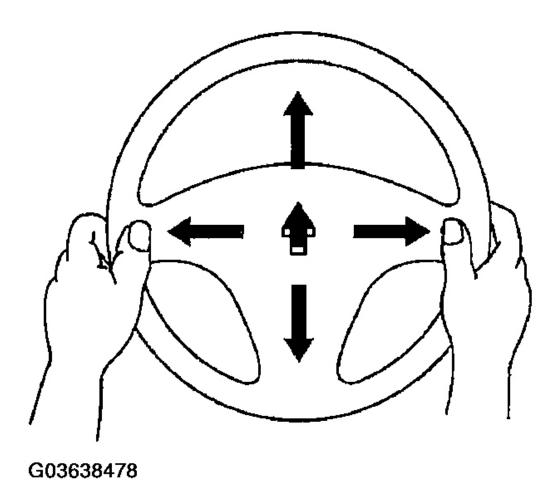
Inspecting Steering Wheel Looseness Courtesy of MAZDA MOTORS CORP.
